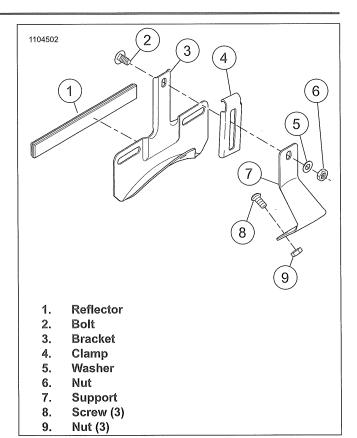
Standard License Plate Bracket DISASSEMBLE AND ASSEMBLE: CENTER MOUNT
